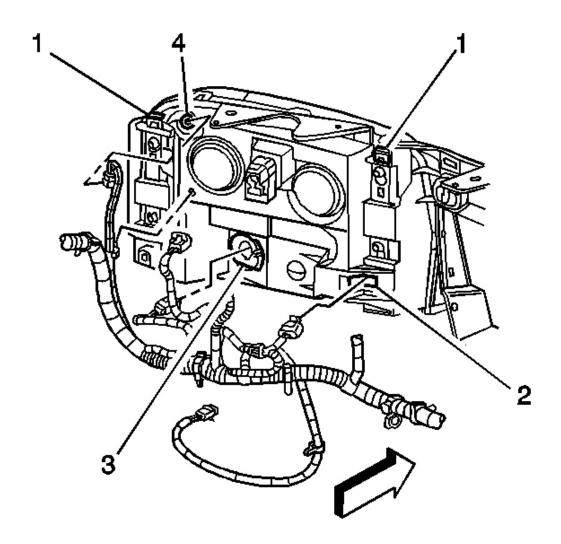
Locating Headlamp Components (TrailBlazer) Courtesy of GENERAL MOTORS CORP.
